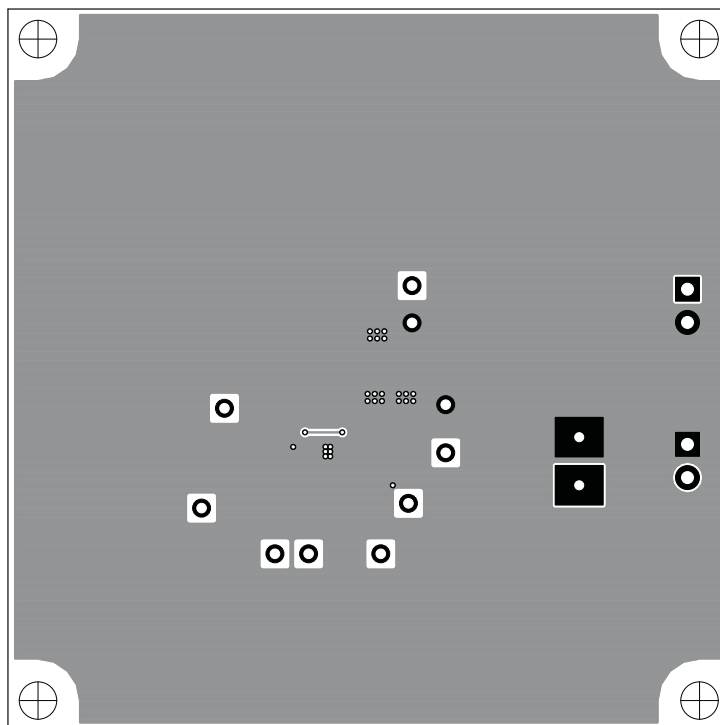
TPS54140EVM-429 Bottom-Side Layout
